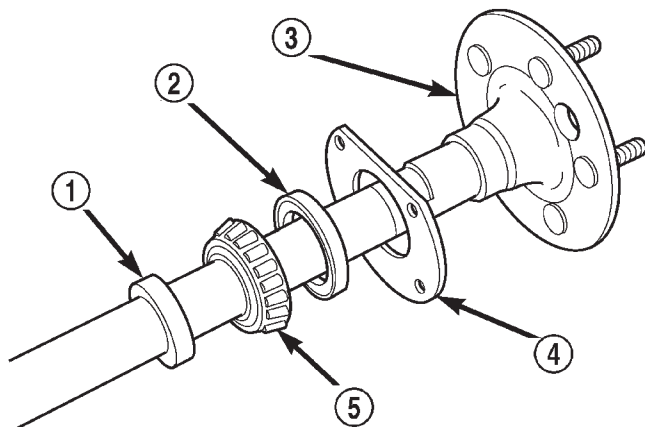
AXLE BEARING AND SEAL COMPONENTS
